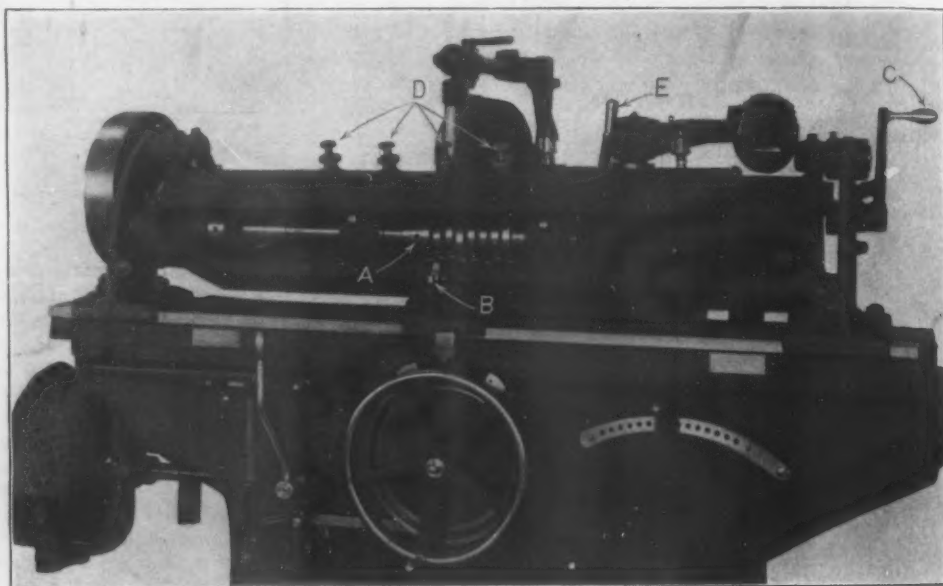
Front View of an Integral Cam Grinding Attachment for Use on Plain and Universal Grinding Machines Made by the Landis Tool Company, Waynesboro, Pa.
